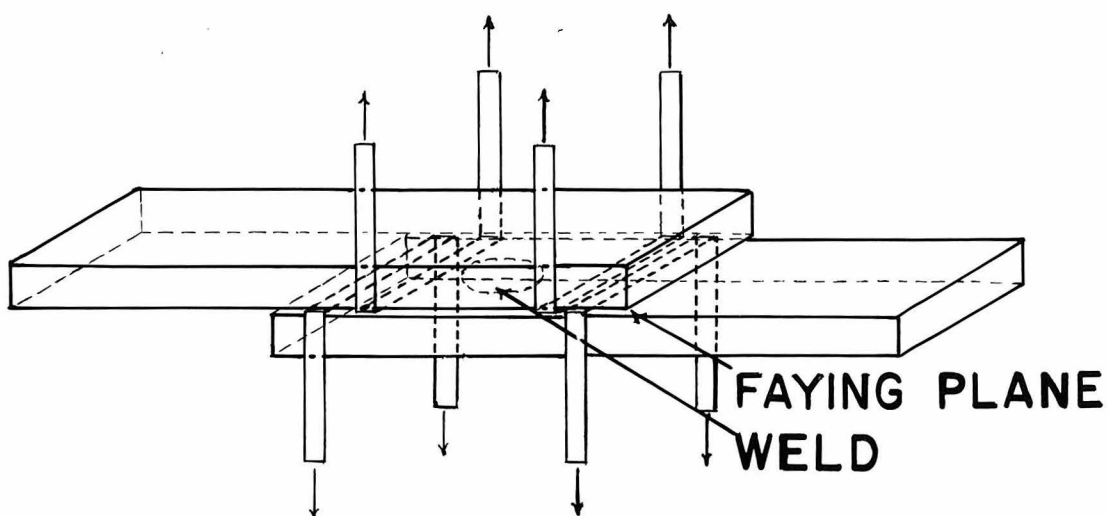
SKETCH OF MECHANICAL PROOF TESTING TOOL.
